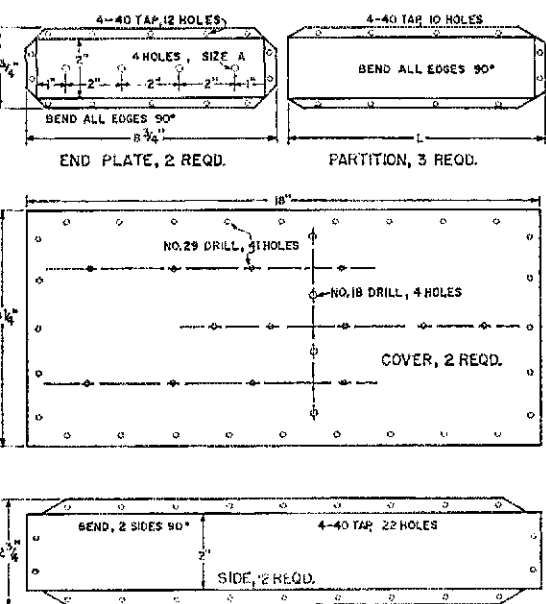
Metal work suggestions for duplicating the filter described. As some dimensions will depend on available materials and assembly methods used, dimensions given should be regarded as approximate only. End plates are silver-plated brass. The size-A holes are No. 10 drill, for the tuned end of the filter, and  $\frac{3}{8}$ -inch diameter for the grounded end of the lines. Two different-size partitions are needed, dimension L being 13 inches for the center one and 10 inches for the two on either side. No side plates would be needed if a chassis is used, and only one cover plate would be required. The 4 holes for mounting the line supports are needed in the bottom cover (or chassis surface) only.
